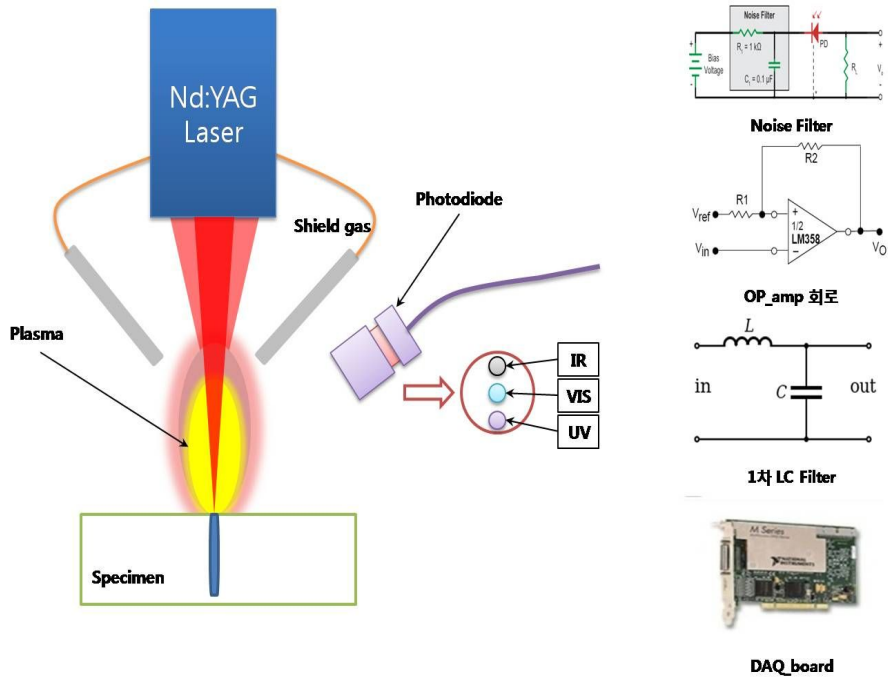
Schematic diagram of the laser welding monitoring system
